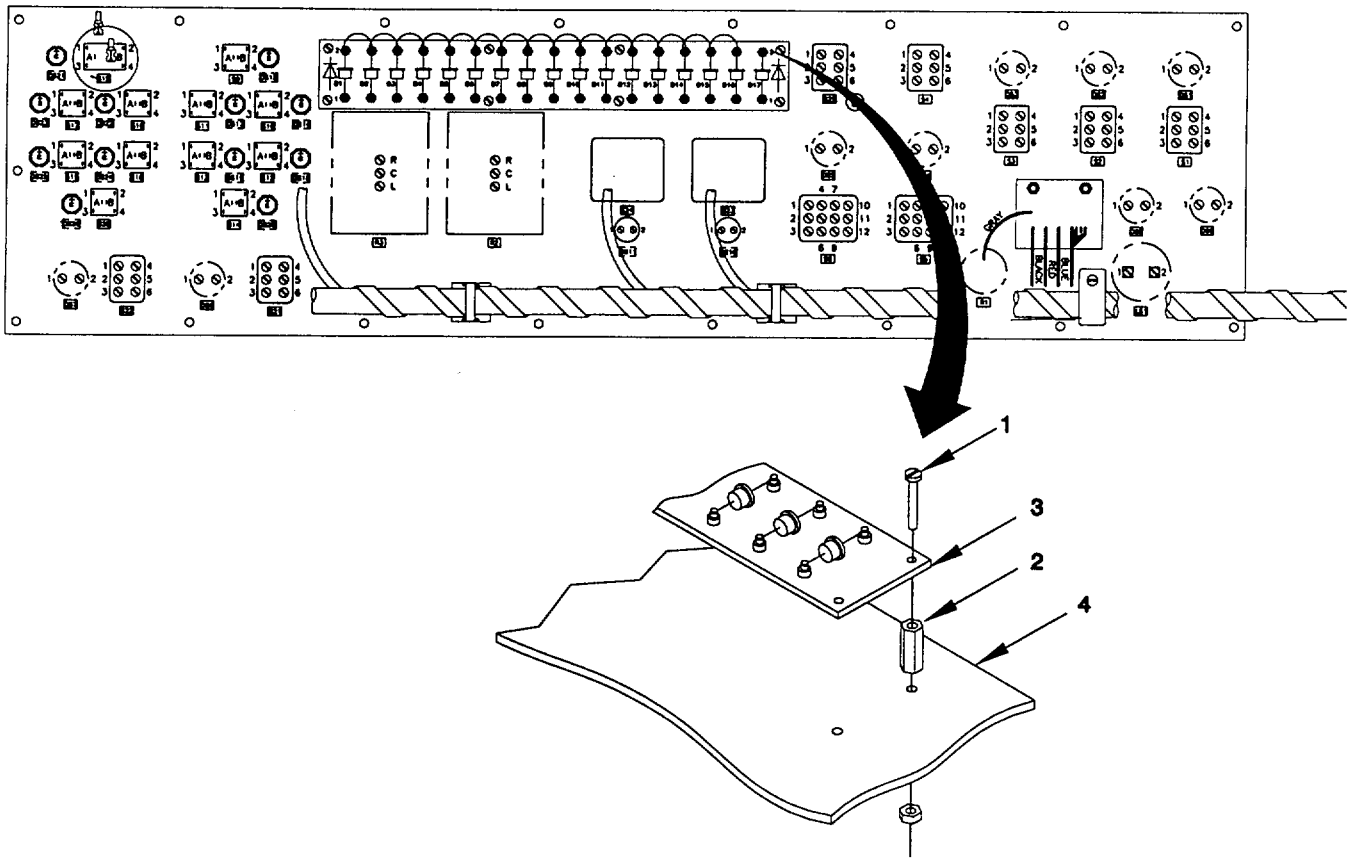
Diode Board Assembly, Lower Control Panel, Remove/Install.
